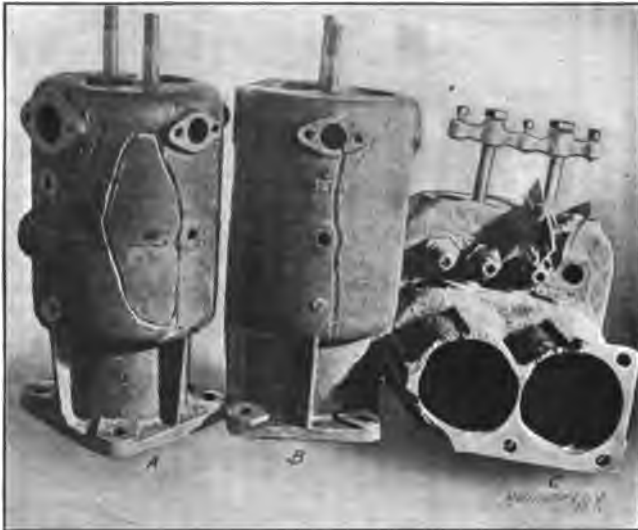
Two Cylinders with Cracked Water Jackets prepared for Welding. Twin Cylinders with Broken Flanges to be Welded
